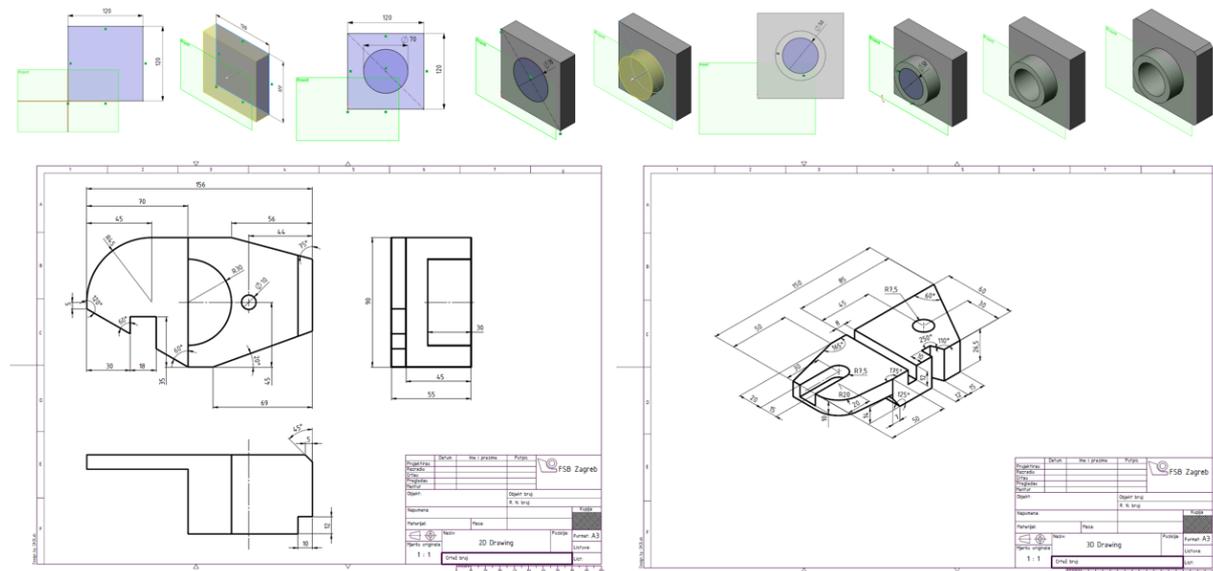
Parts for 3D CAD modelling based on the steps (top), the 2D drawing (left bottom), and the 3D drawing (right bottom)
